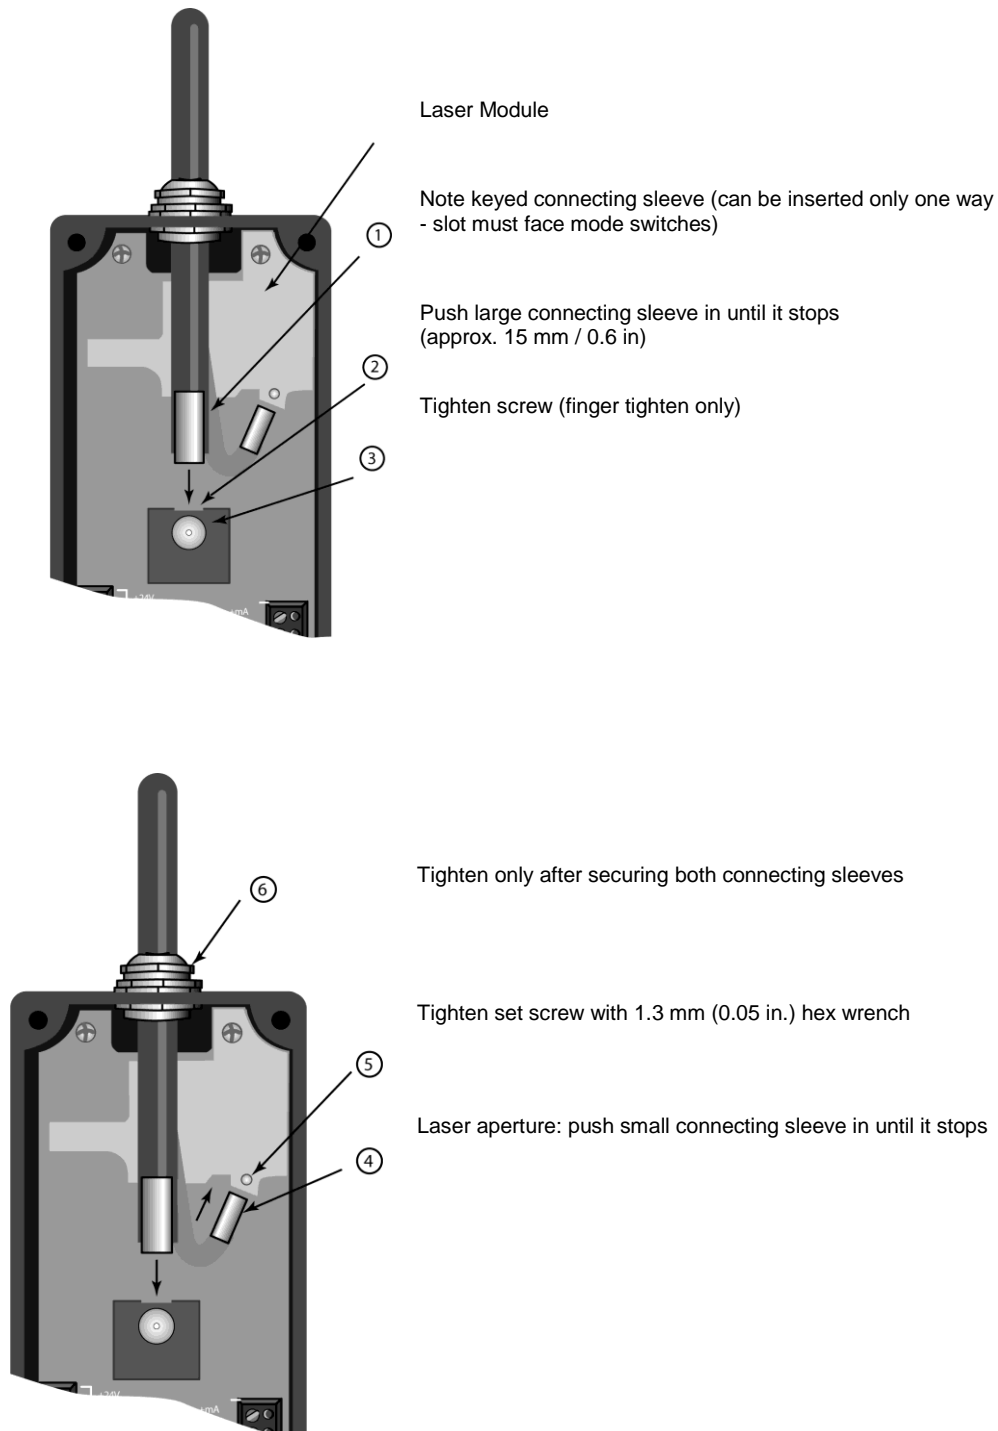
Mounting the Fiber Optic Cable for Laser sighting devices
